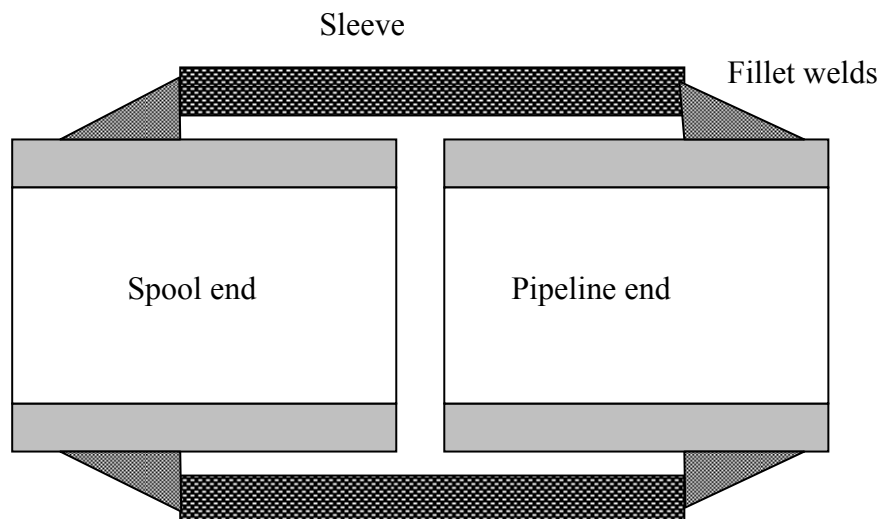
The principle of the welded sleeve as installed: The outer sleeve connects one of the cut ends of the pipeline with the spool replacing the damaged part of the pipeline.
